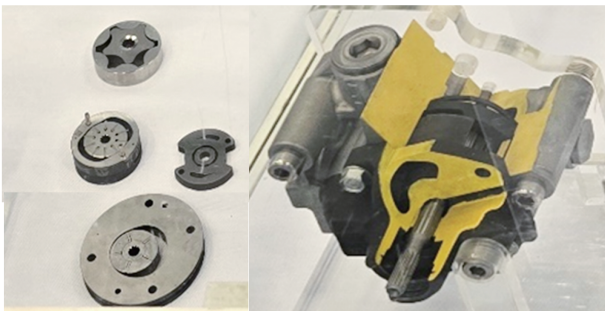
Pump parts (left) / Mechanical pump for CVT (right)
